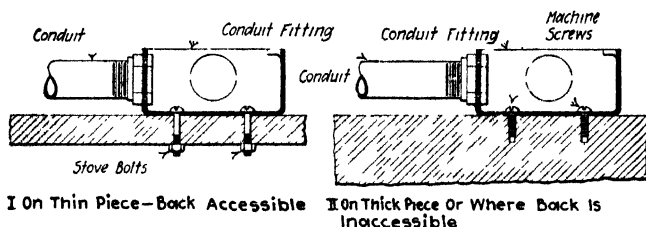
Methods of fastening conduit boxes or fittings to machine parts
